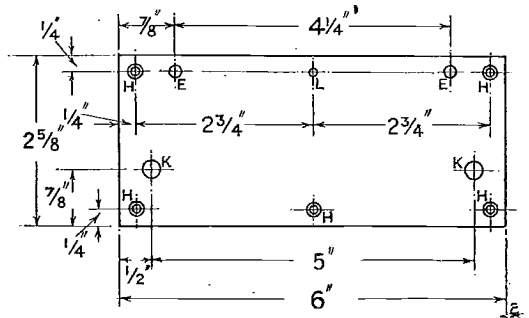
Details of ebonite pieces for platform. Drilling particulars:—E, 5/32 in. dia.; K, 1/4 in. dia.; H, 1/8 in. dia. and countersunk; L, topped 4 B.A.
